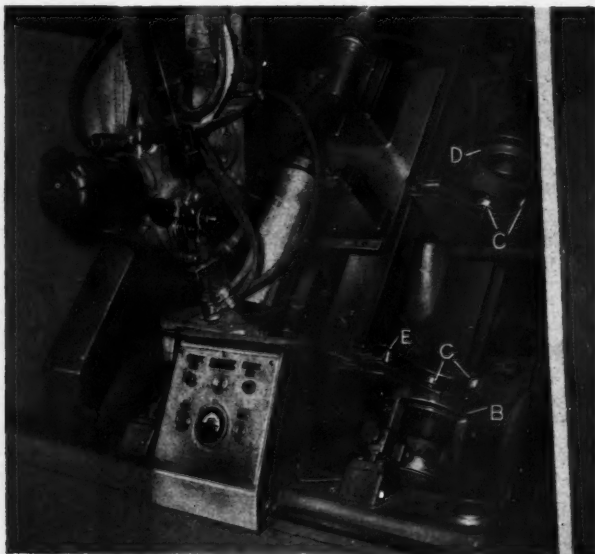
At this set-up on a 2-station Associated Electrical Industries, Ltd., 30-kVA automatic machine, the end-caps are welded to the outer tubes by the CO₂ shrouded arc process. Each weld is completed in a cycle time of 32 sec.
